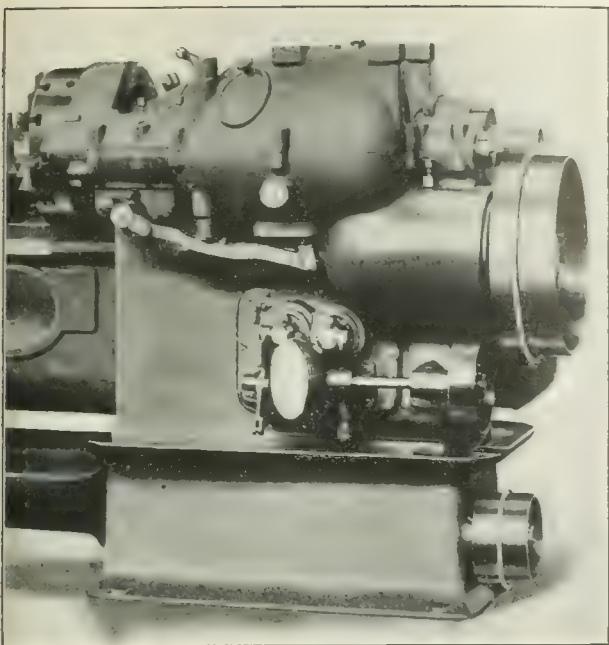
Rear View of the Headstock, Showing the Driving Mechanism.
